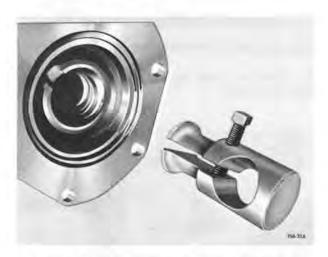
Installing Sleeve Remover Tool With Griper Jaws Contracted
